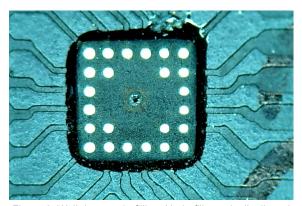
Well done underfilling. Underfill evenly distributed underneath of the chip (view of PCB with chip removed)
